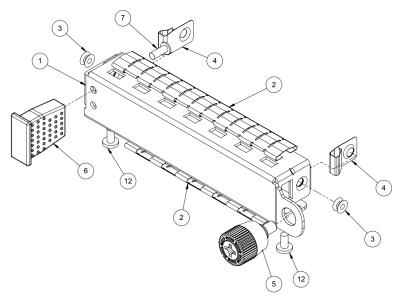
Small Card Standard I/O Bracket with Thumbscrew and Pulltab (2D View)
